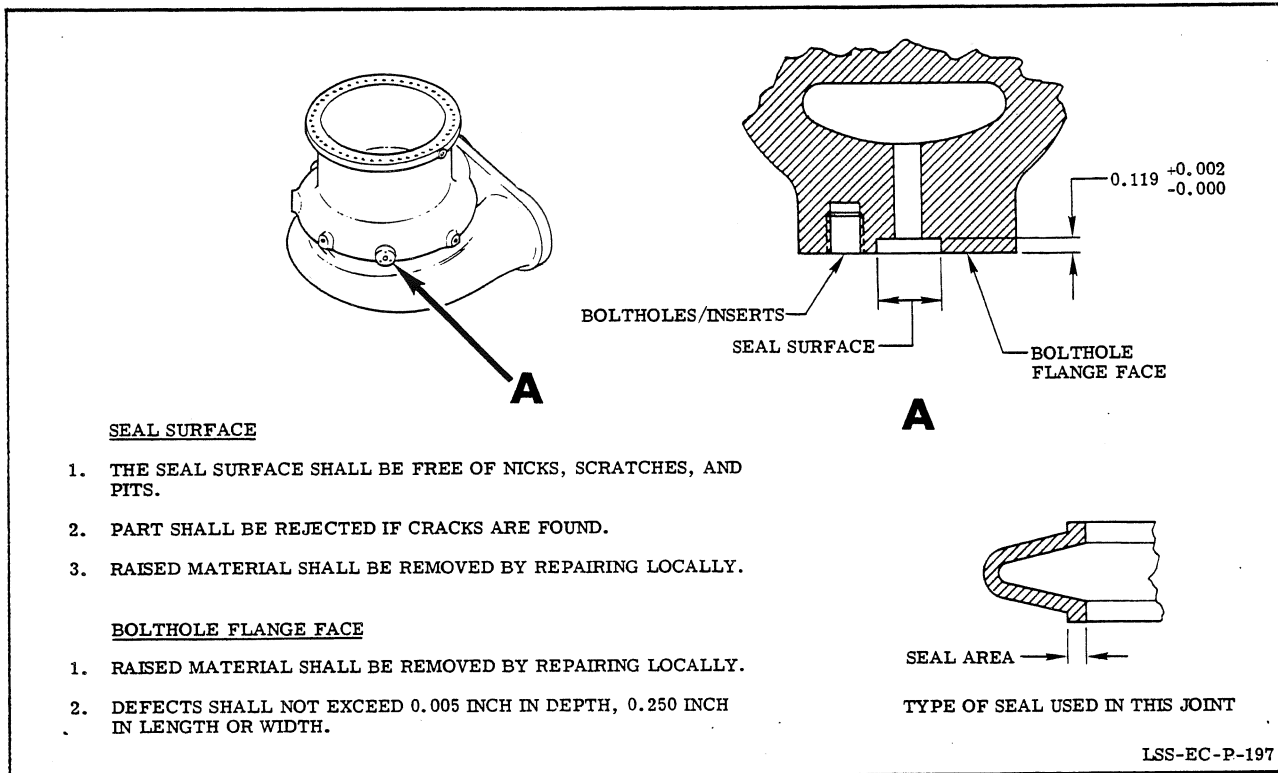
LPOTP Housing RS007802 Turbine Drive Manifold Closeout Seal Surface Inspection Guide (Joints 01.2 and 01.3)
